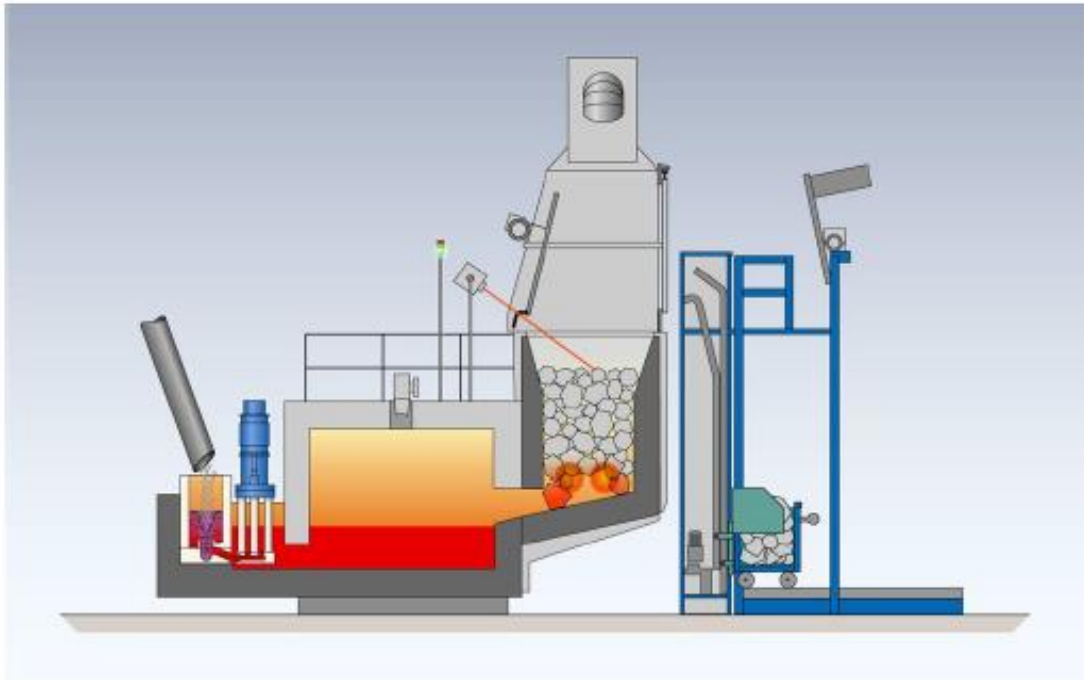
Schematic drawing of reverberatory furnace [6].
